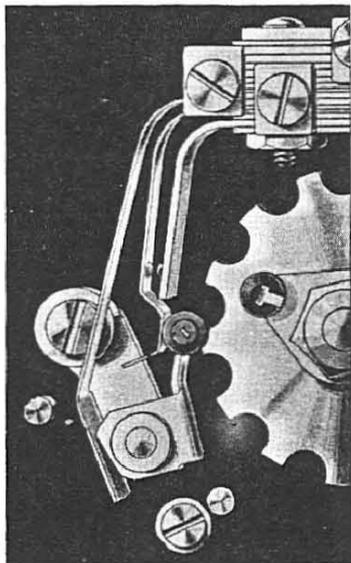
TRIGGER MECHANISM—TRIGGER RIDING OVER TOOTH OF PULSE WHEEL AFTER RELEASE OF FINGER PLATE
